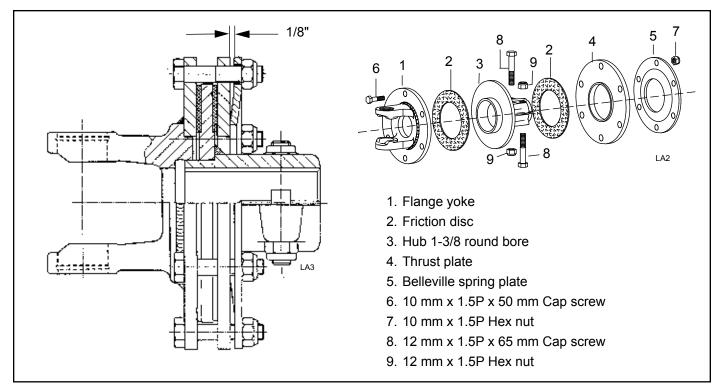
BW10.52 & BW15.52 Slip Clutch Assembly
